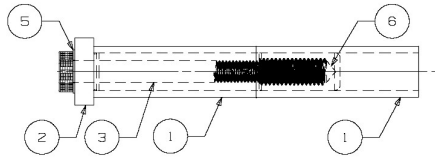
Test specimen 6 with 1: SiC tubes polished to $RA = 0.3 \mu\text{m}$ on contacting ends, 2: aluminium end, 3: 8 mm. threaded end, 5: 8 mm. nut
